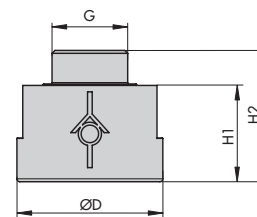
Check valve (1790-7408 and 1790-9645)
